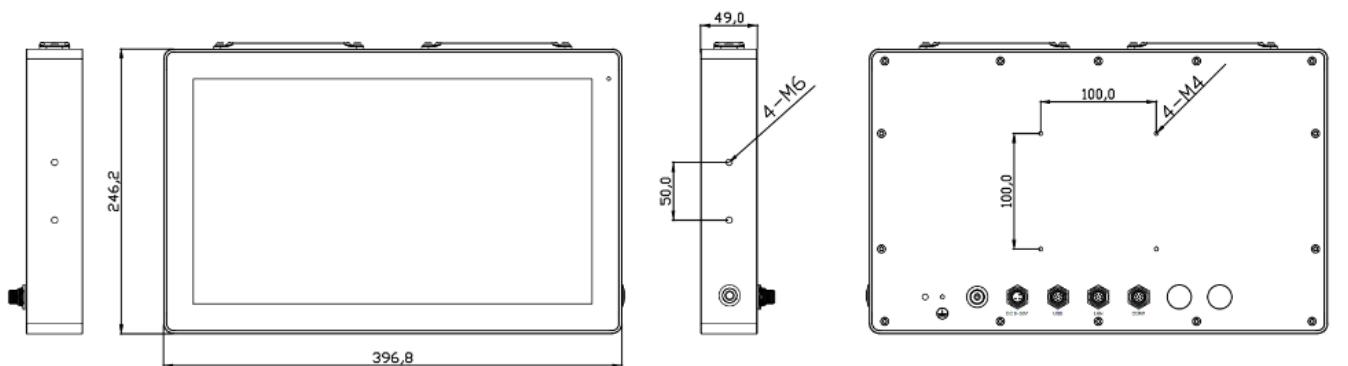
2 Dimensions of NuTAM -816CP(H)
